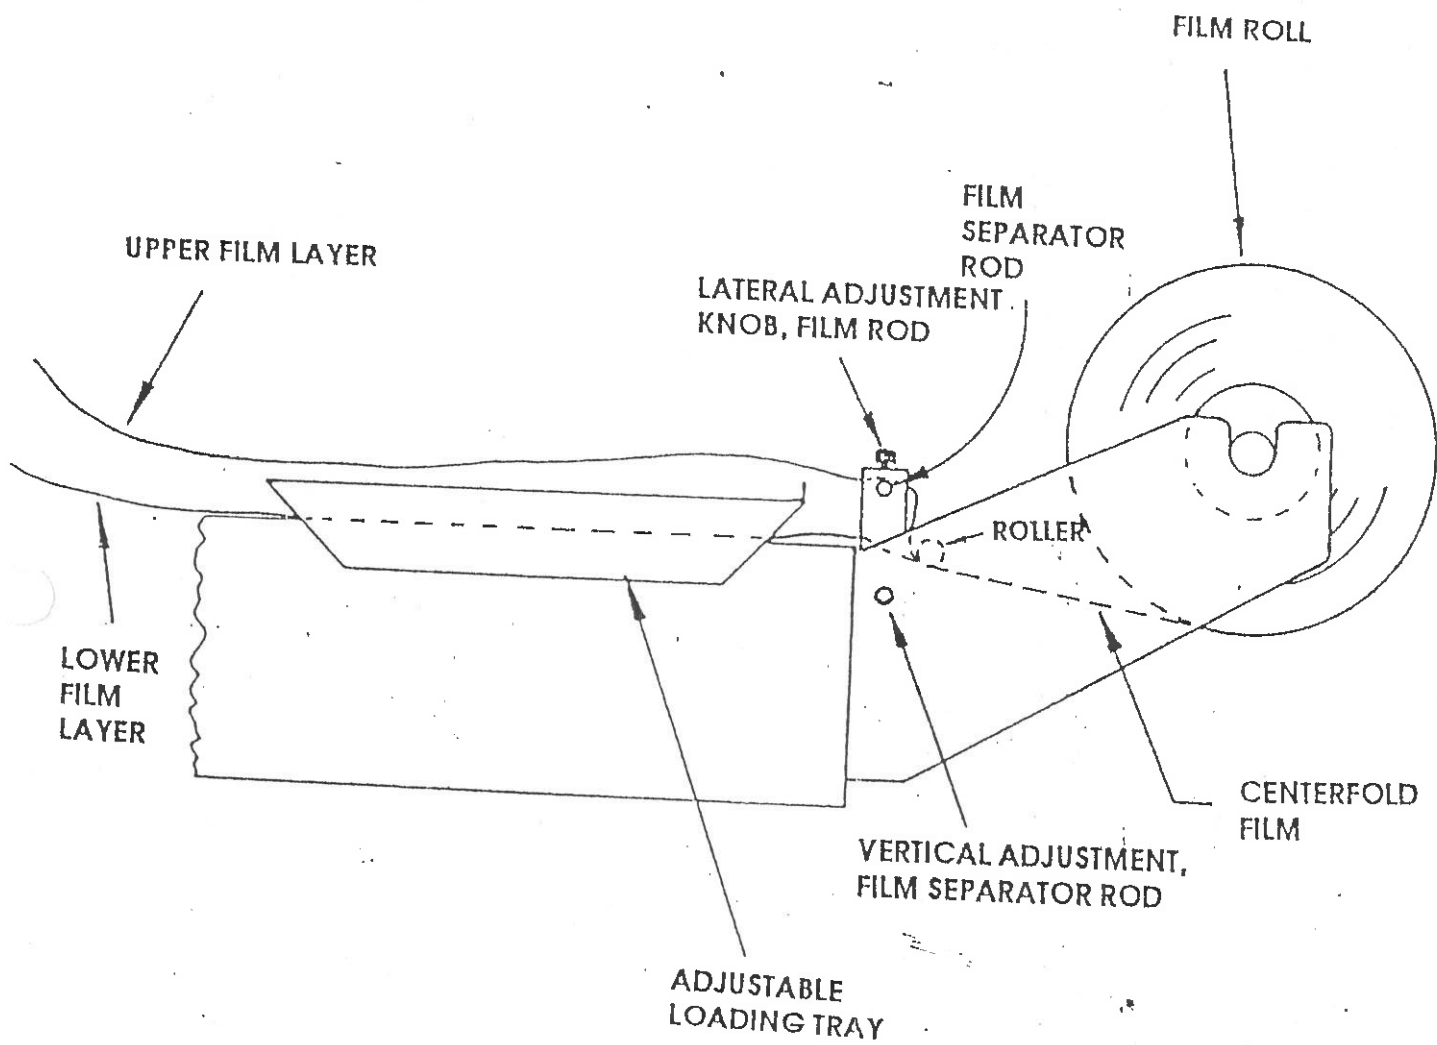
Film Threading Diagram, 6000 L-Sealer Series
